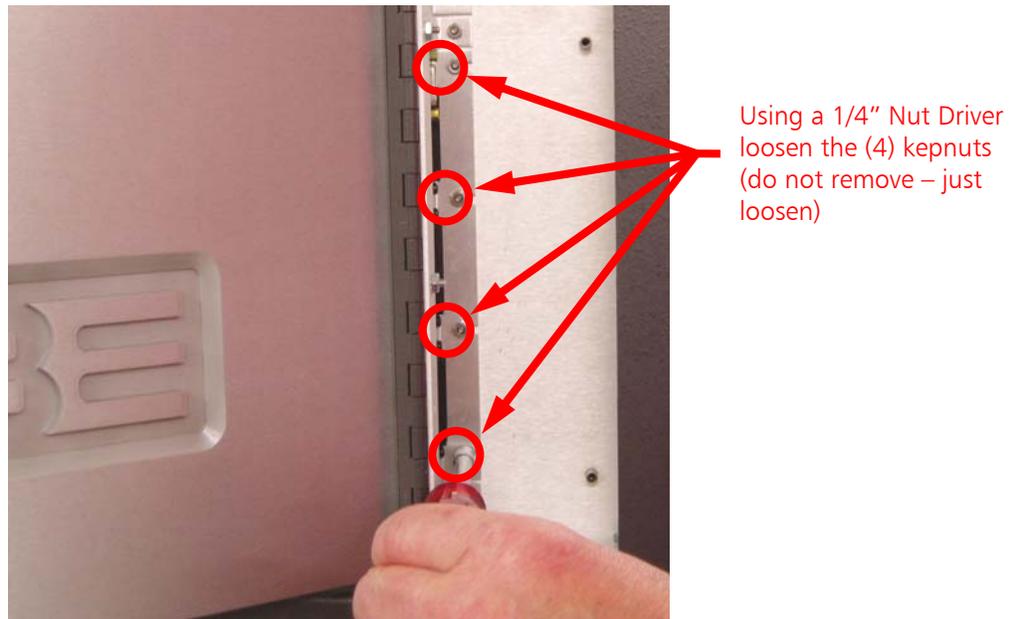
Loosen System Controller PCB Bracket Kepnuts
